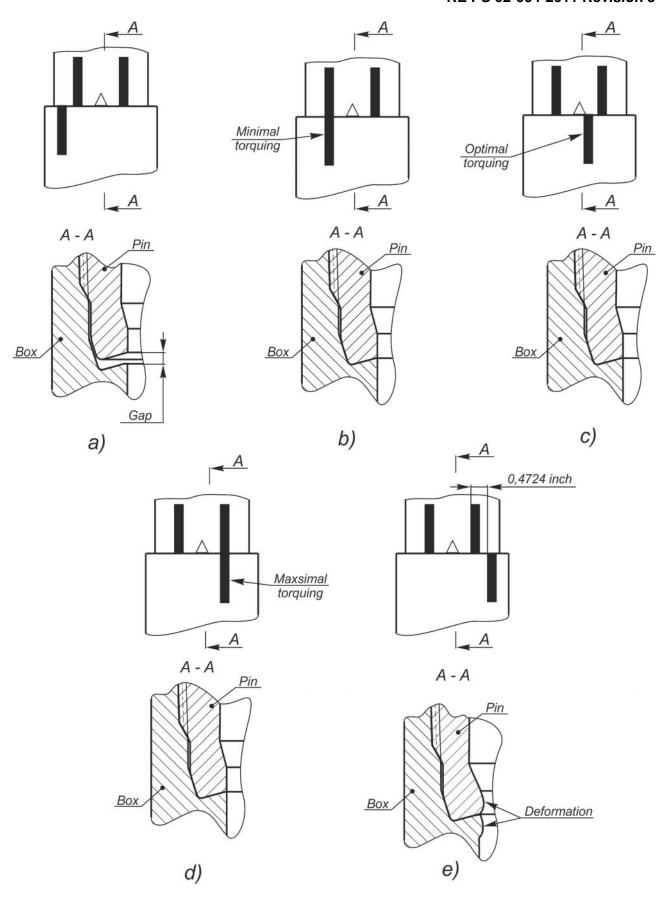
Locations of make-up marks and mating surfaces of thread shoulders
